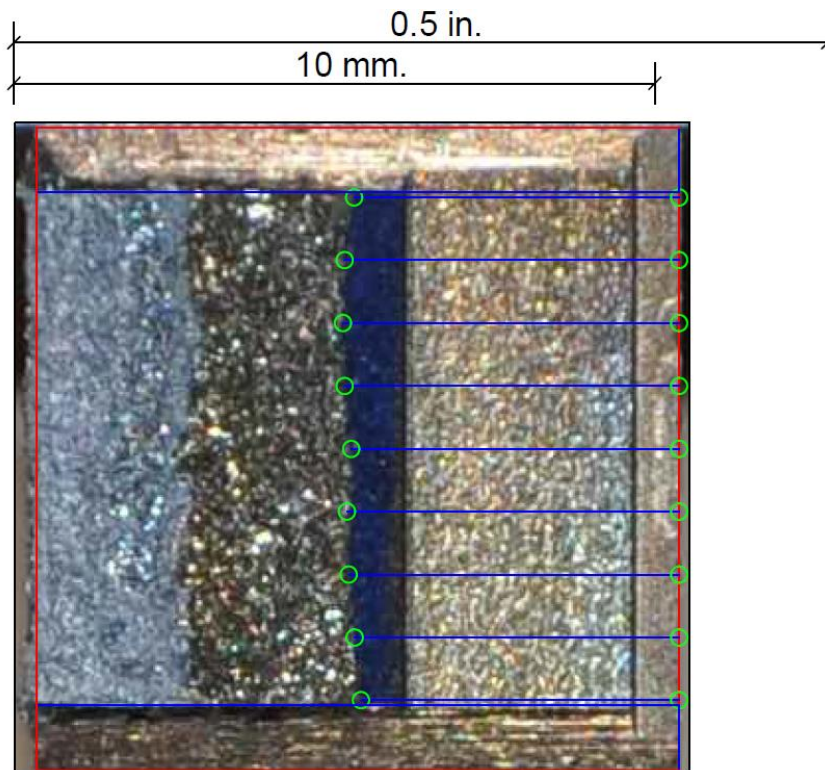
Specimen P12' Fracture Surface
